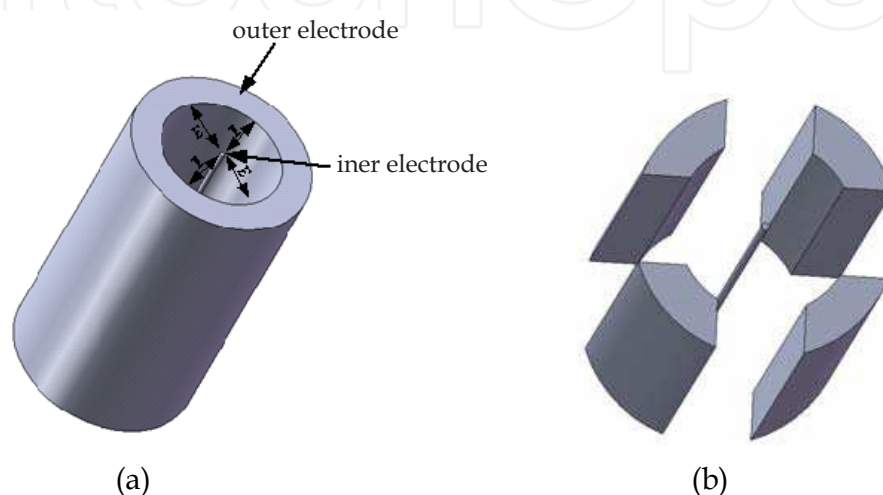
Line - tube structure. (a) Traditional line - tube structure; (b) Improved line - tube structure.
